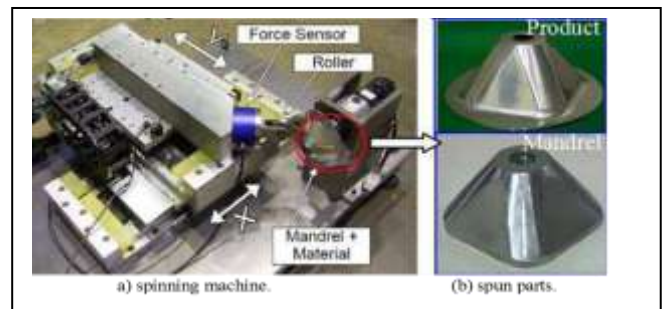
Linear motor driven metal spinning machine and spun parts [32]
